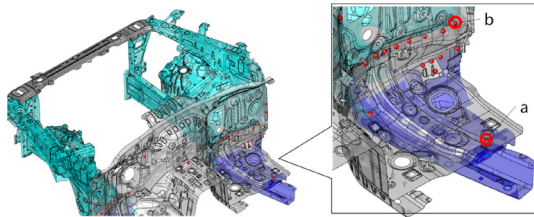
Parts Condition and Spot-Welding Point
